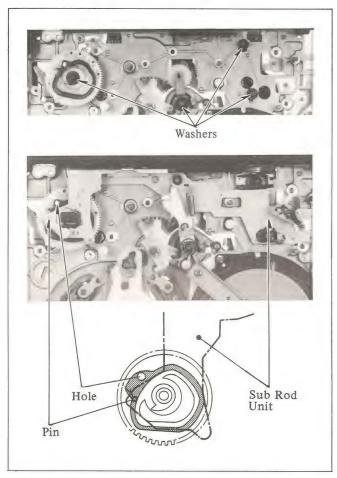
Assembly and Adjustment of Gears and Rods-(6)
